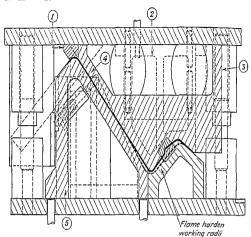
Section through die to produce part shown in Fig. 12-13.
